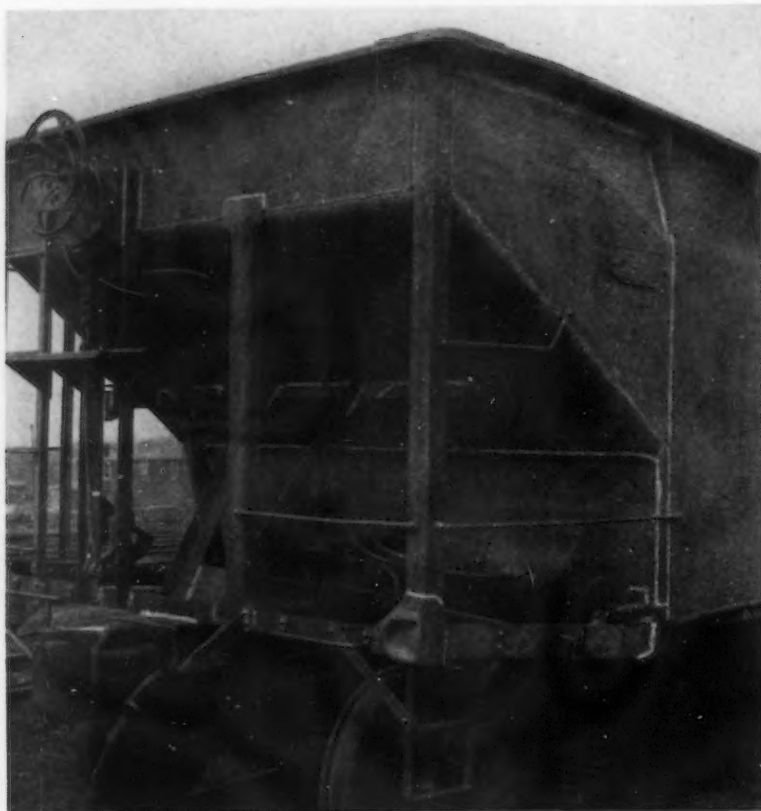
Close-up view showing manner of joining the sides and ends of car by welding.
